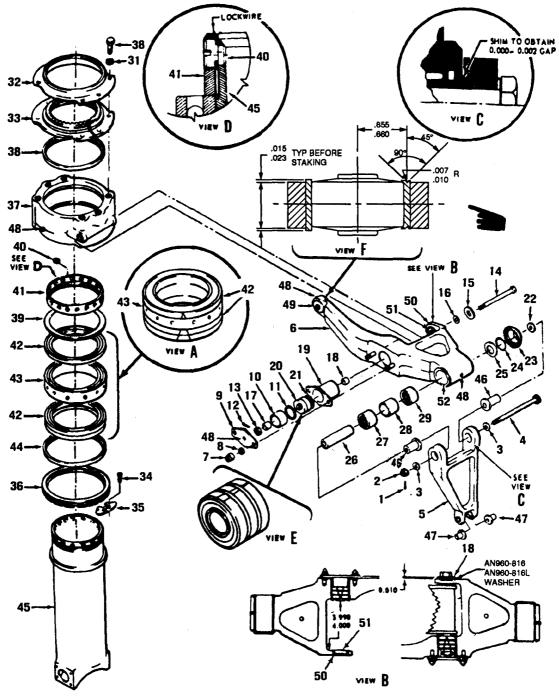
Scissors and Sleeve Assembly - Exploded View
